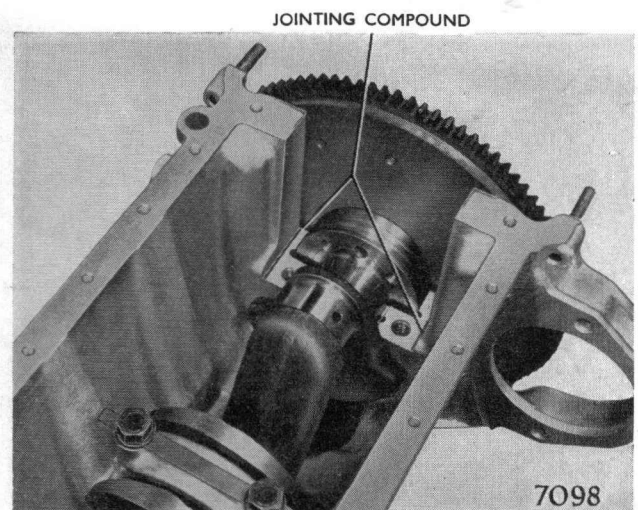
Places at which jointing compound is applied before fitting rear main bearing cap
